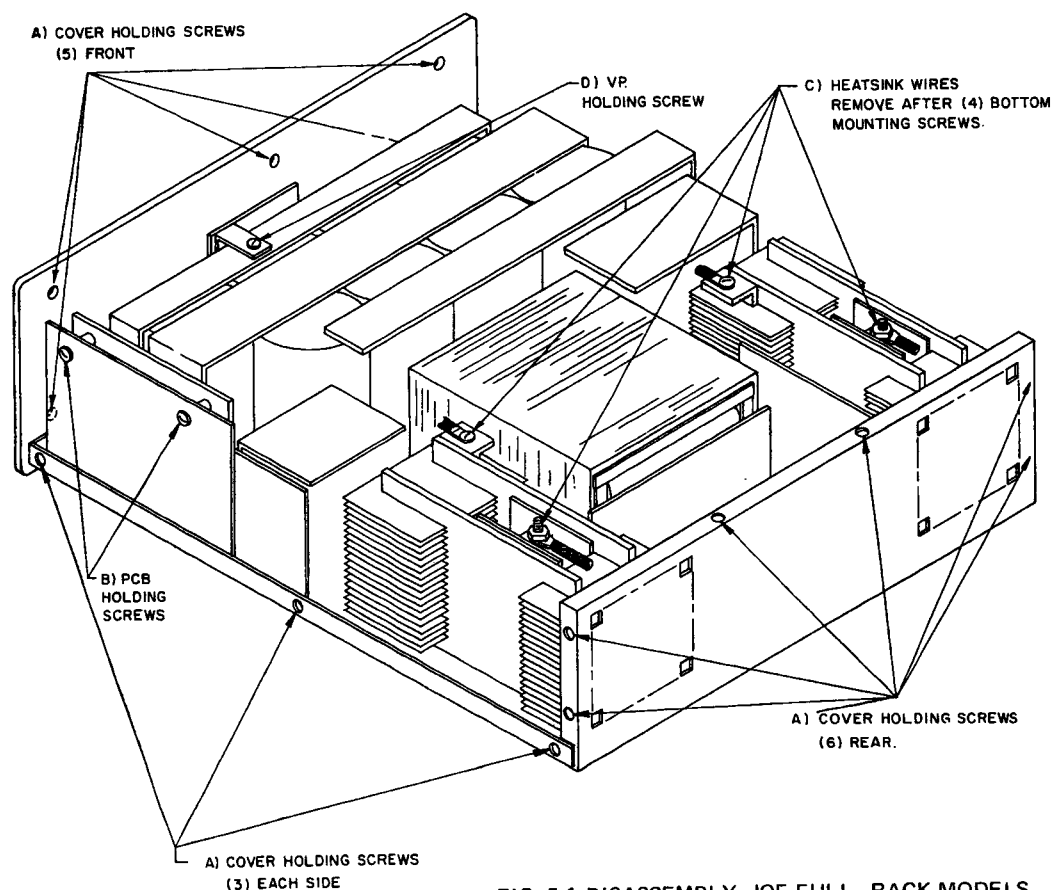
DISASSEMBLY, JQE FULL-RACK MODELS
